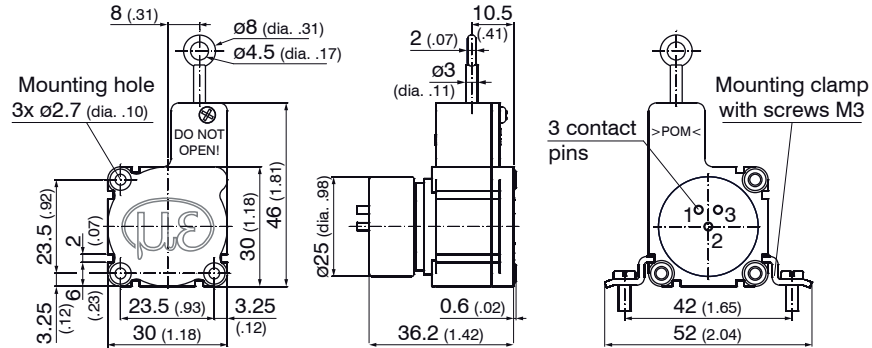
Dimensional drawing WPS- ... -50MK30 with potentiometer or encoder, dimensions in mm (inches), not to scale
